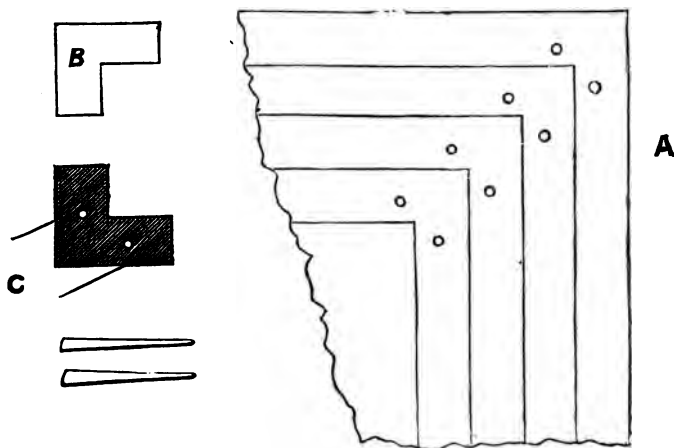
CLAMPING BOARD FOR MITRED FRAMES.
